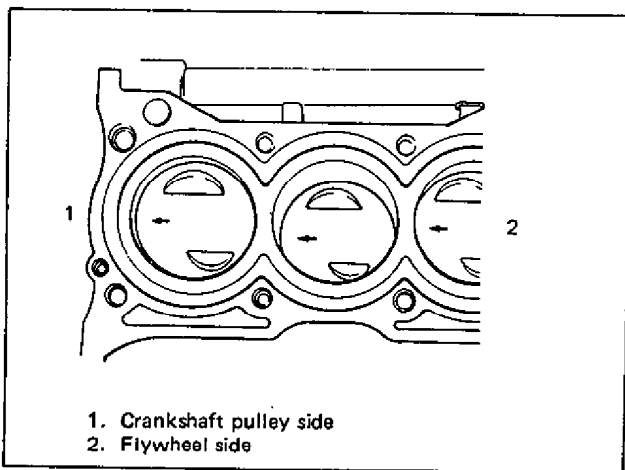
A-127 Direction of Arrow Mark on Piston Head
